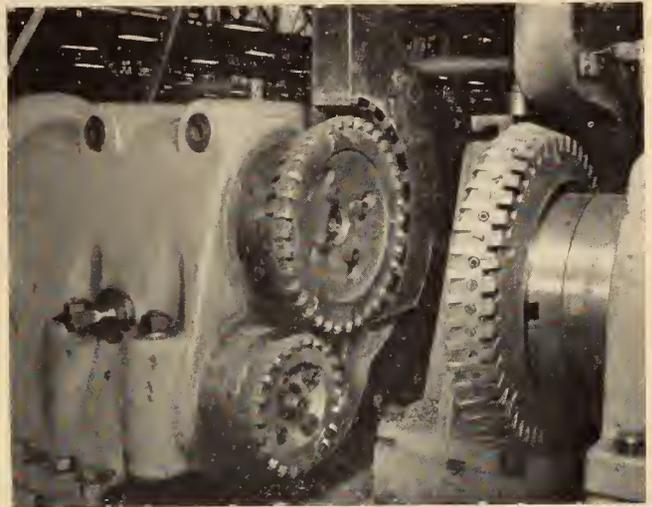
A special contour exhaust hood at the edge of cast iron milling cutters. Courtesy Detroit Diesel Engine Division, General Motors Corporation.
